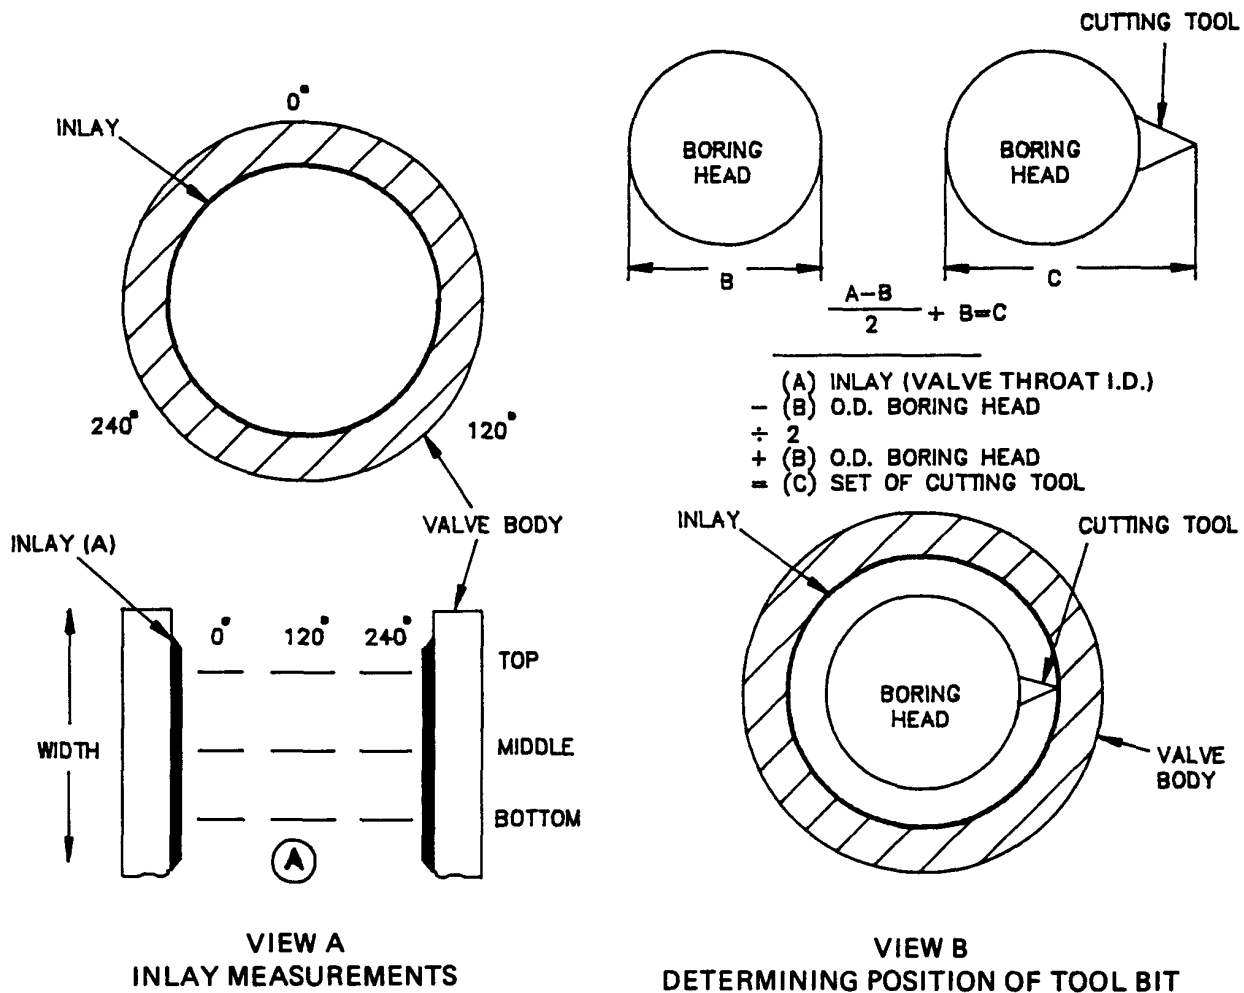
Inlay Measurements and Positioning of Tool Bit
